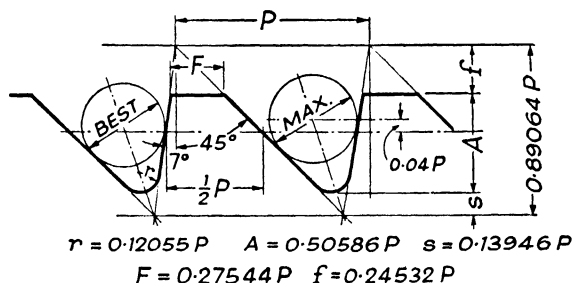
BUTTRESS THREAD OF 7°/45° FORM
